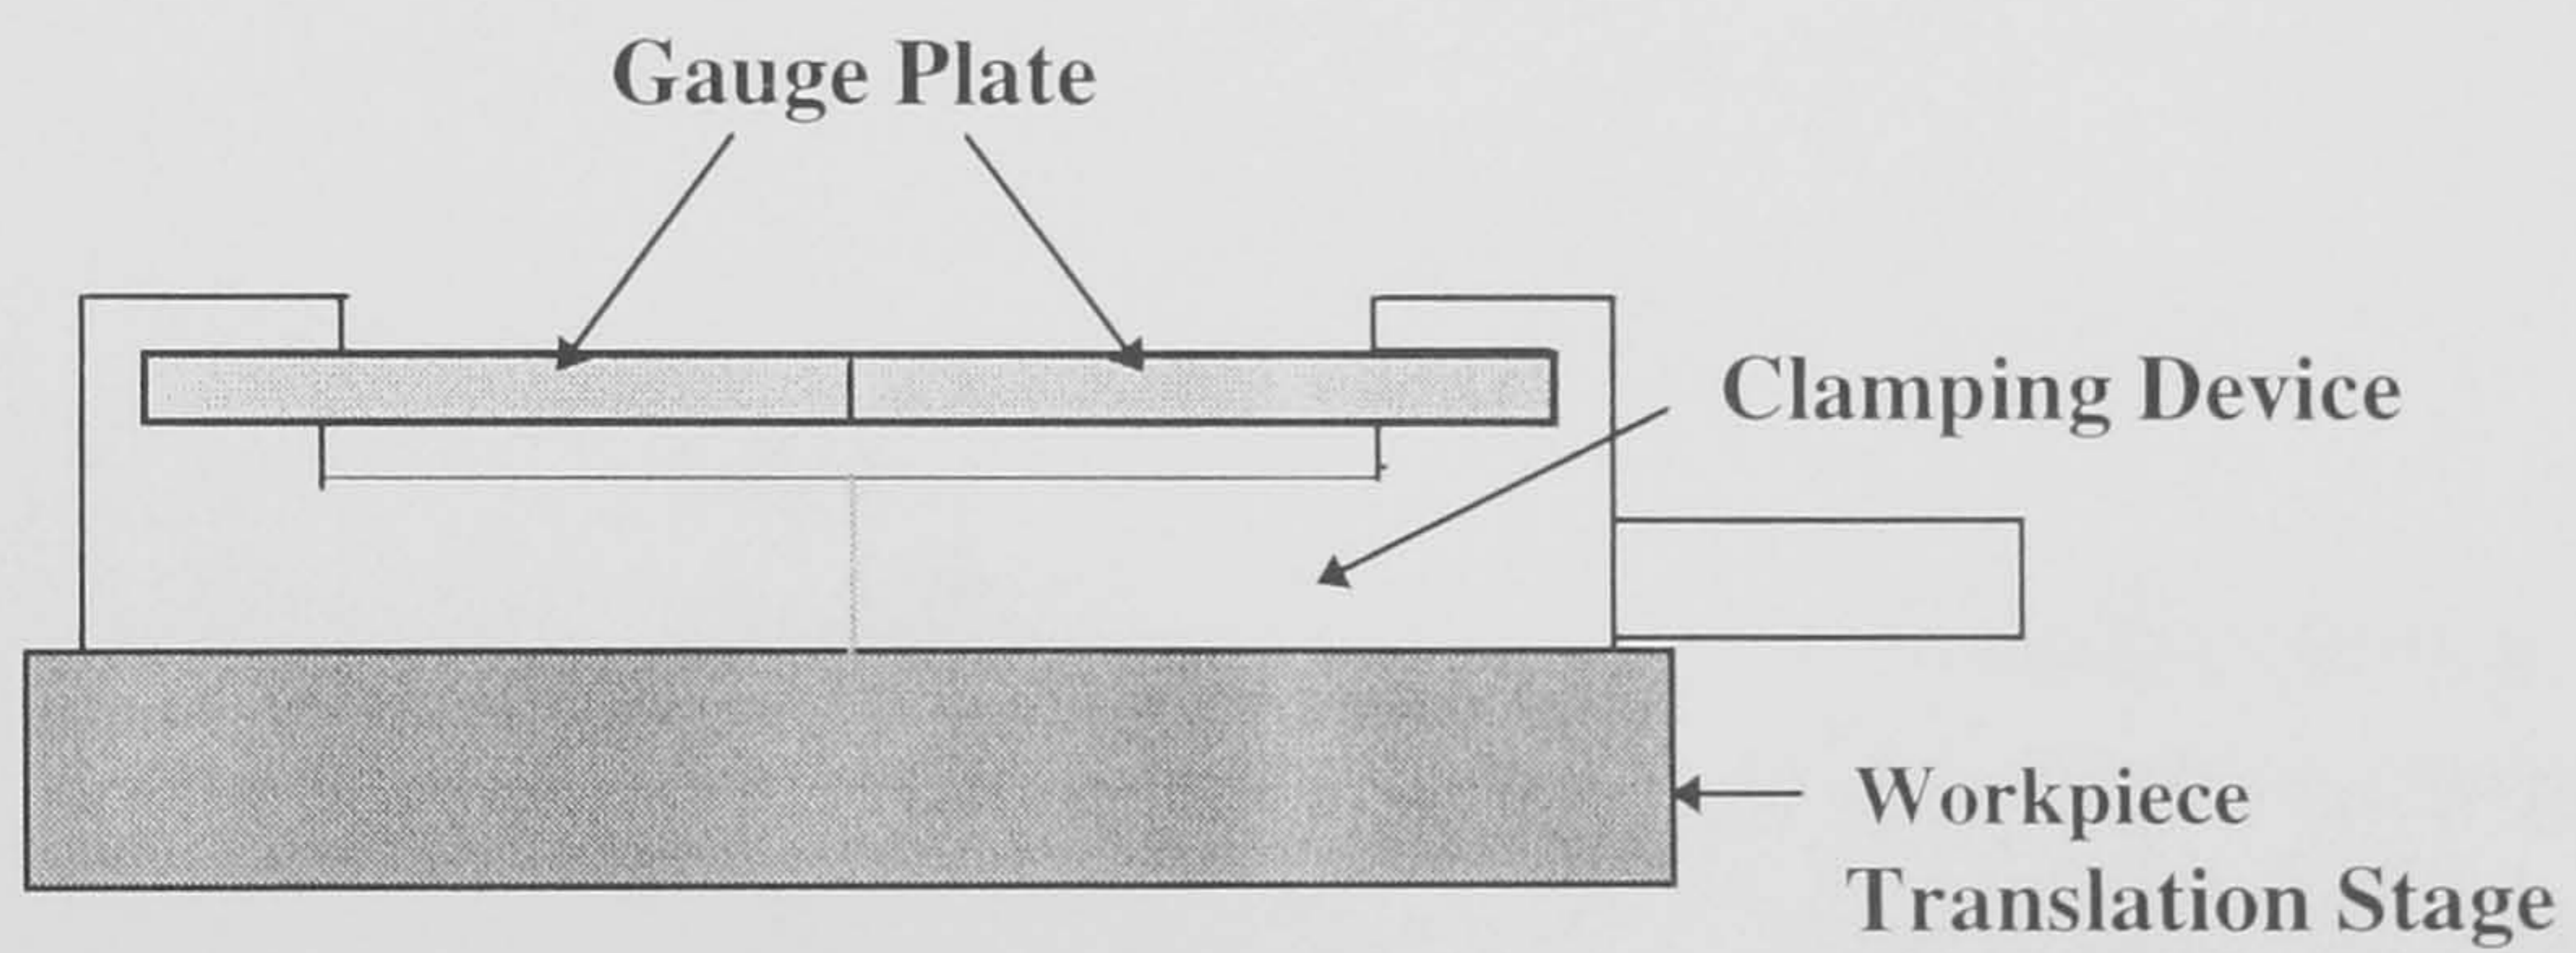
Clamped Geometry For Laser Welding
